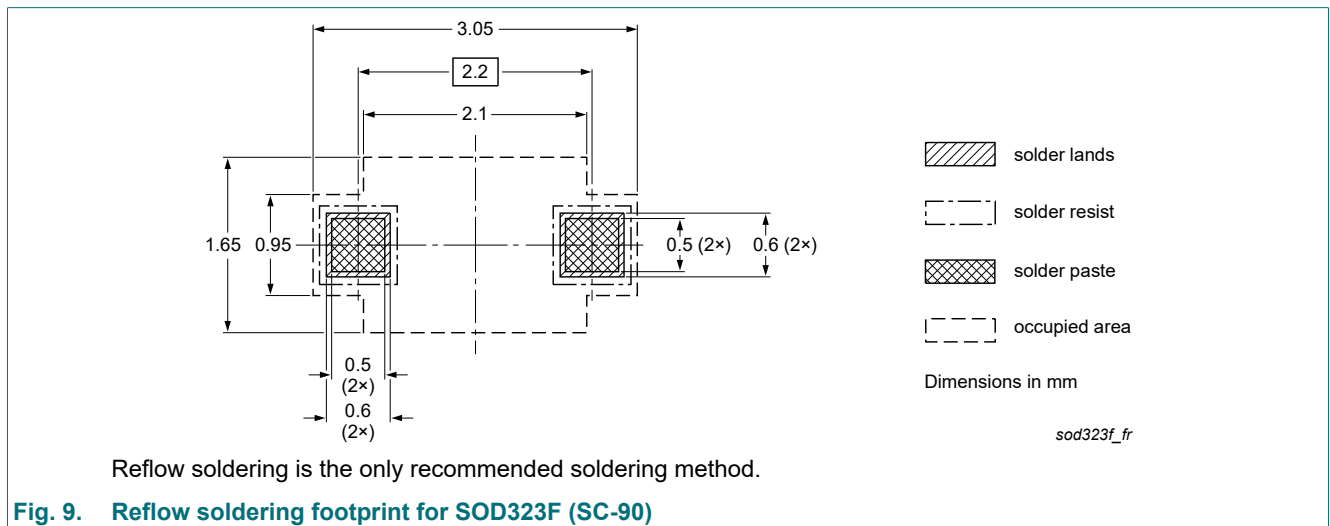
Reflow soldering footprint for SOD323F (SC-90)
